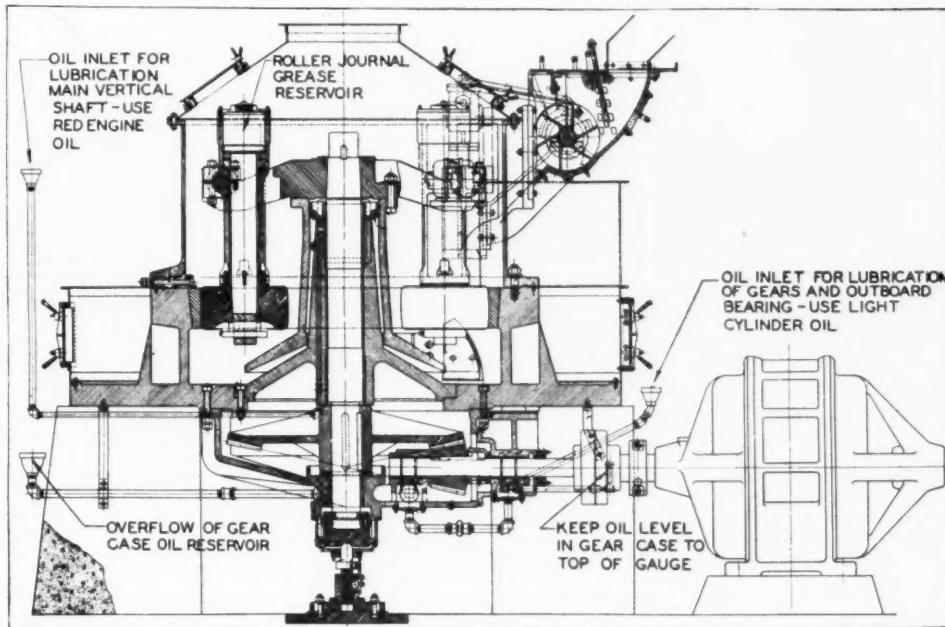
Sectional view of the Raymond Super Roller Mill. Attention is drawn to the points of application of lubricants to the driving gears, the main vertical shaft and the roller journals.
